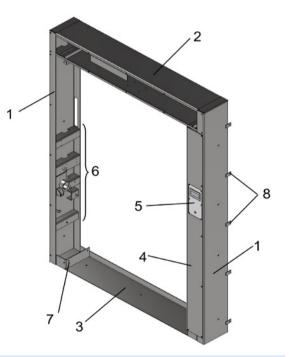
Frame of the window-to-balcony case welded from bent steel profiles: 1 - vertical profiles (columns); 2 - top profile with a drive system case; 3 - bottom profile; 4 - cover mounted on the case; 5 - control panel; 6 - supports with mechanism assembly elements; 7 - cover mounting bracket; 8 - anchor bolts for the assembly of the window-to-balcony usable part
